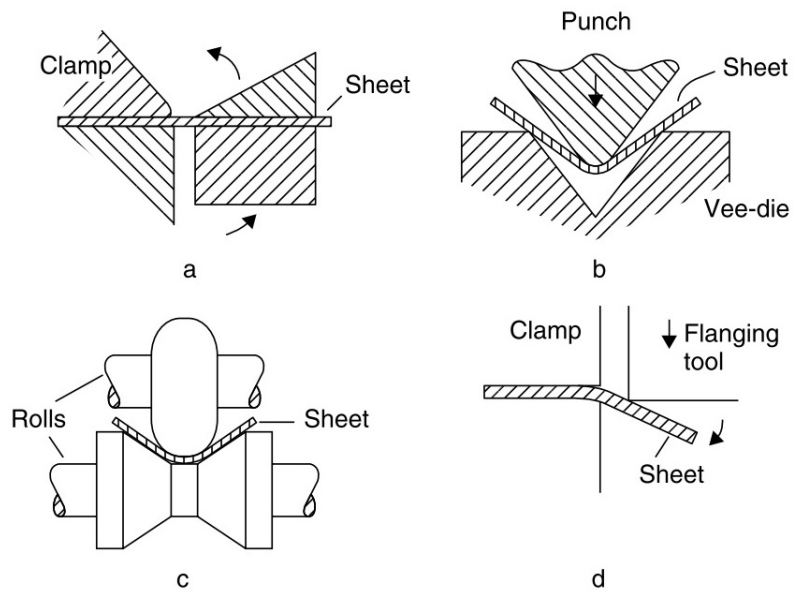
Variations of pure bending: (a) folding machine, (b) press brake bending, (c) roll forming and (d) flange wiping (Marciniak et al., 2002).
